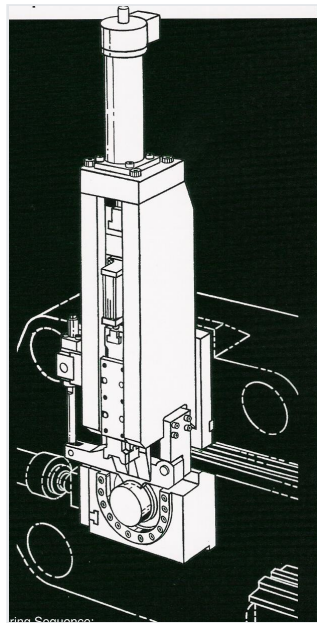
Drawing of improved butt shear (Illustration courtesy of Lake Park Tool)
